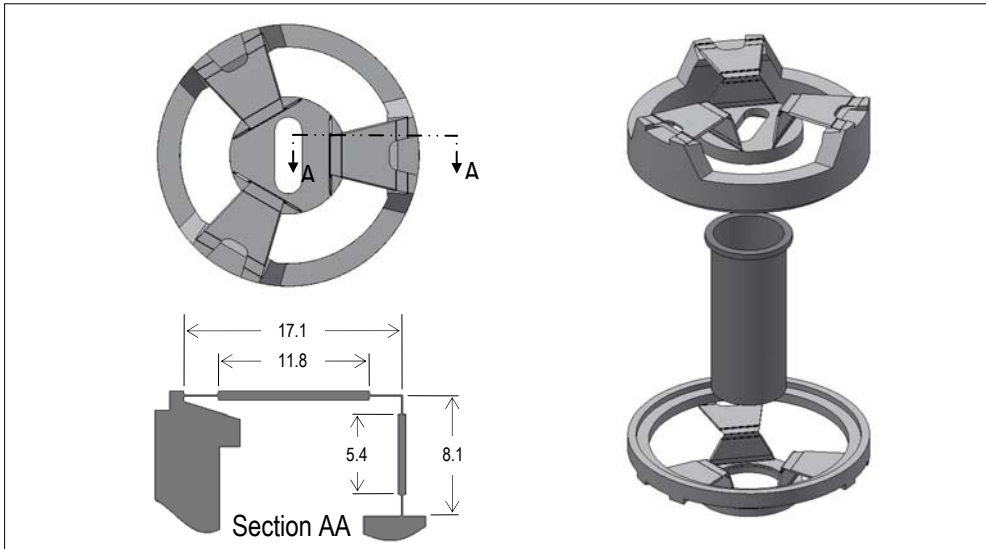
Plate spring dimensions (left) and exploded view of guidance mechanism (right).
